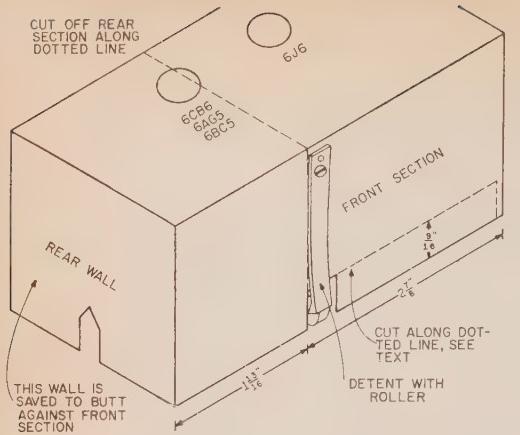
Drawing illustrating the method of forming the basic chassis used for the dipper. If the same tuner cannot be obtained the same basic modification should be performed.
